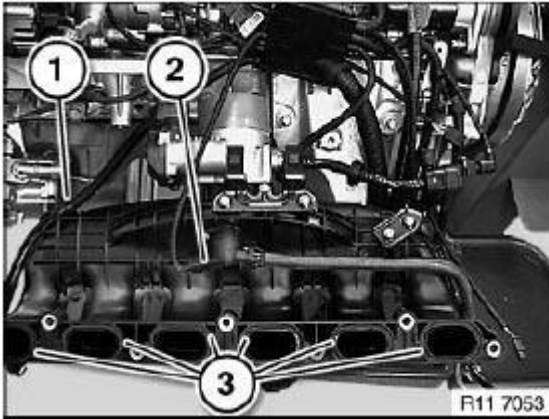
Identifying Cable Tie, Plug Connection And Seals
